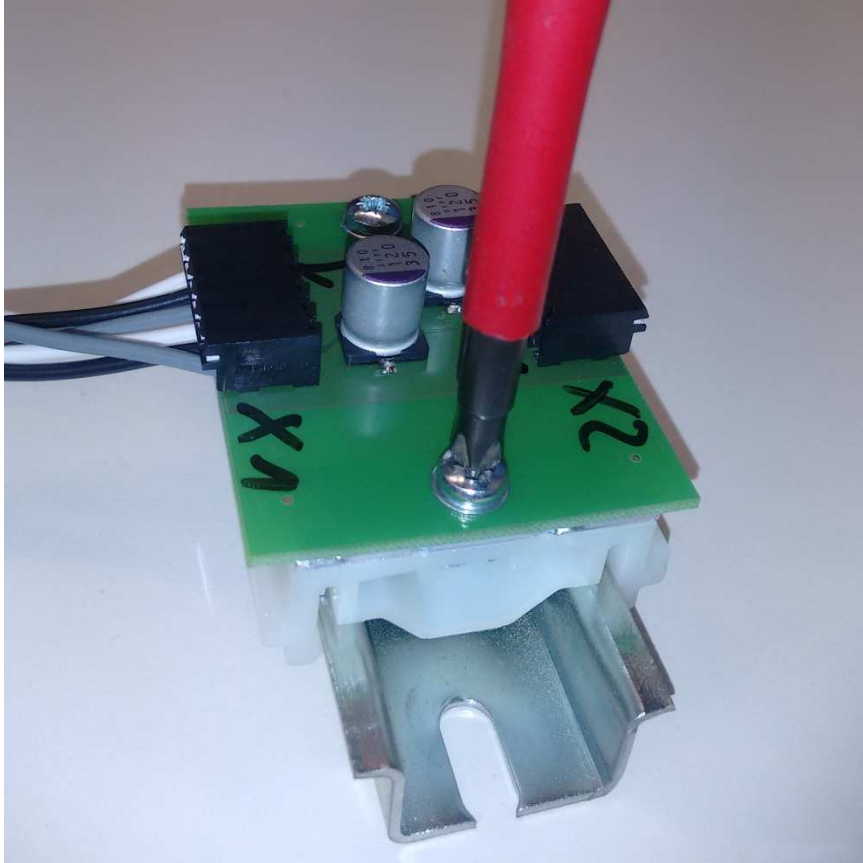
Snap on top hat rail clips of the condenser board before installing the top hat rail and tighten. By screwing the clips they are clamped on the top hat rail. The board can thus no longer move laterally.
